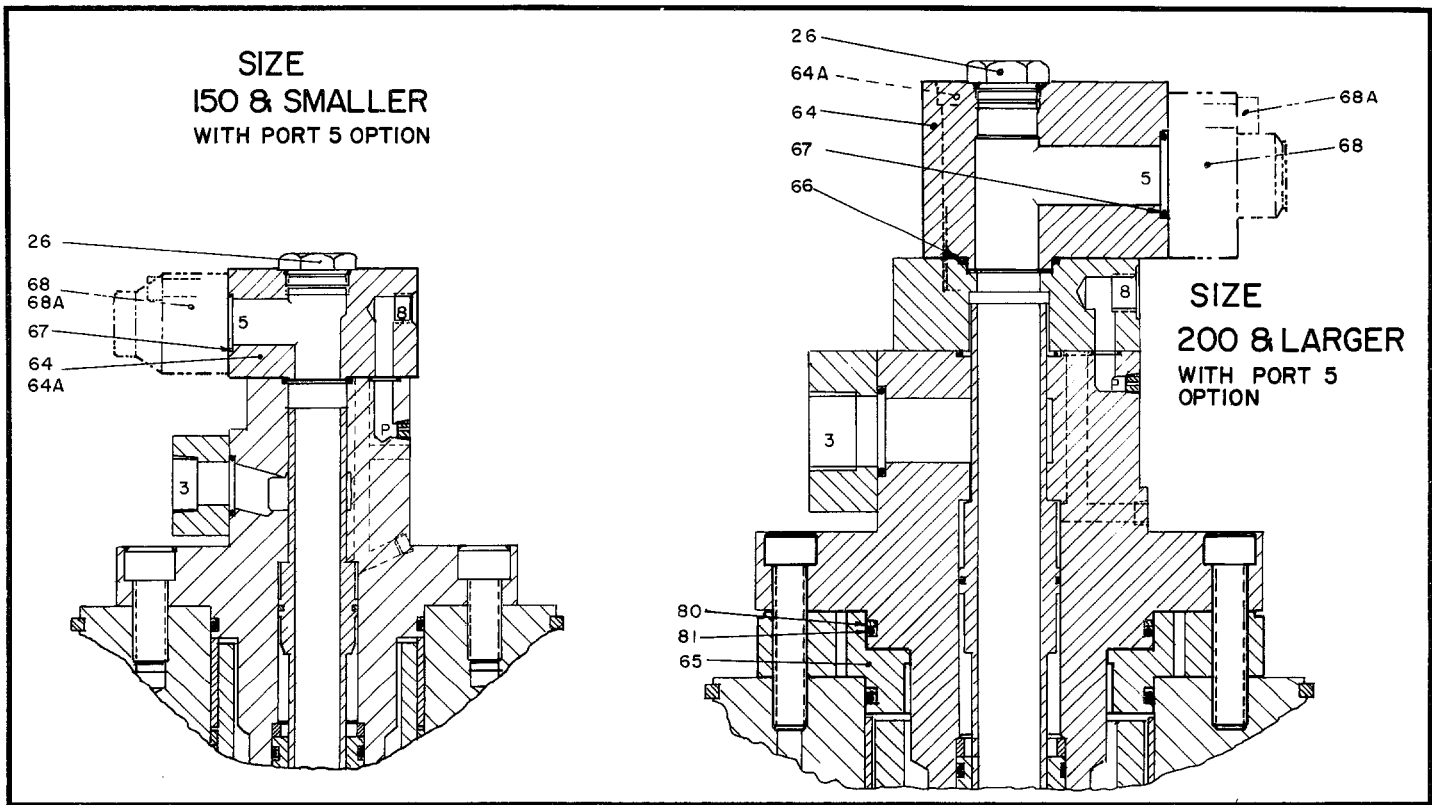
Parts Drawing, Showing Modifications for Port 5 Option (508280C sht. 2).
